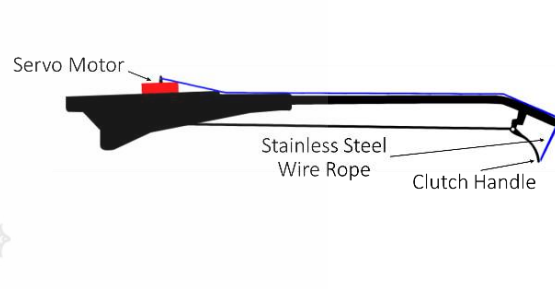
Second Modification of Stainless-Steel Wire Connection.
